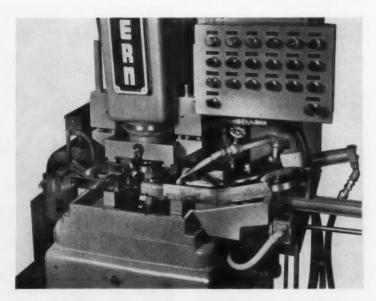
Close-up view of automated single-station Burr-Master equipped to handle internal gears
